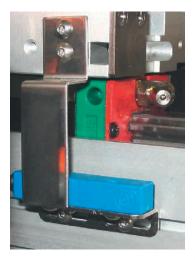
Reference switch and cam switch (linear motor axis installation example)
